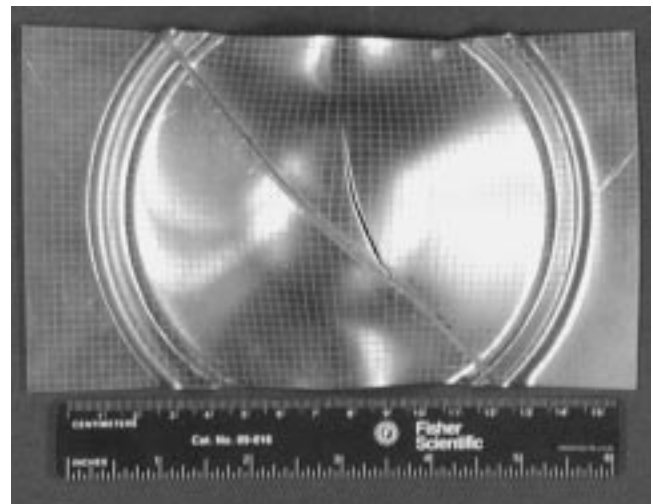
Example of a formed AA5182 LDH specimen (no weld line)
